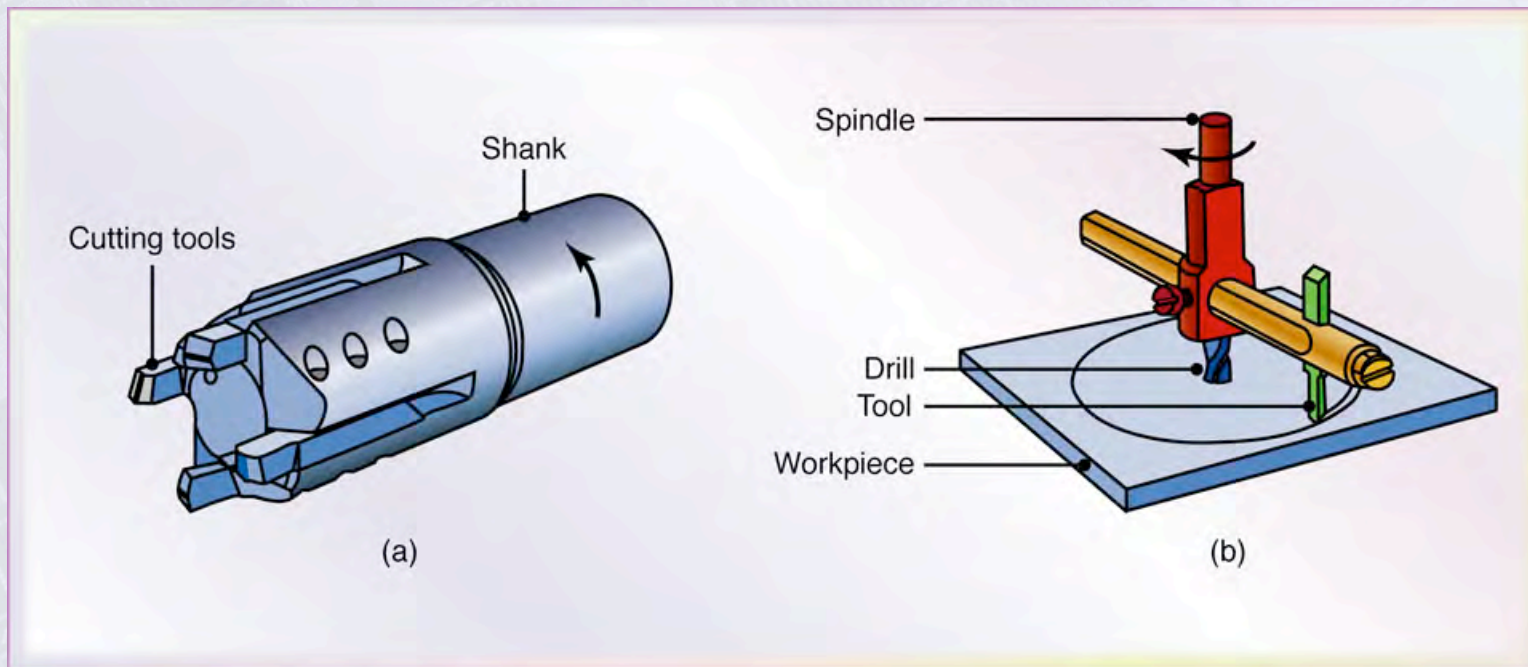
(a) Trepanning tool. (b) Trepanning with a drill-mounted single cutter.
